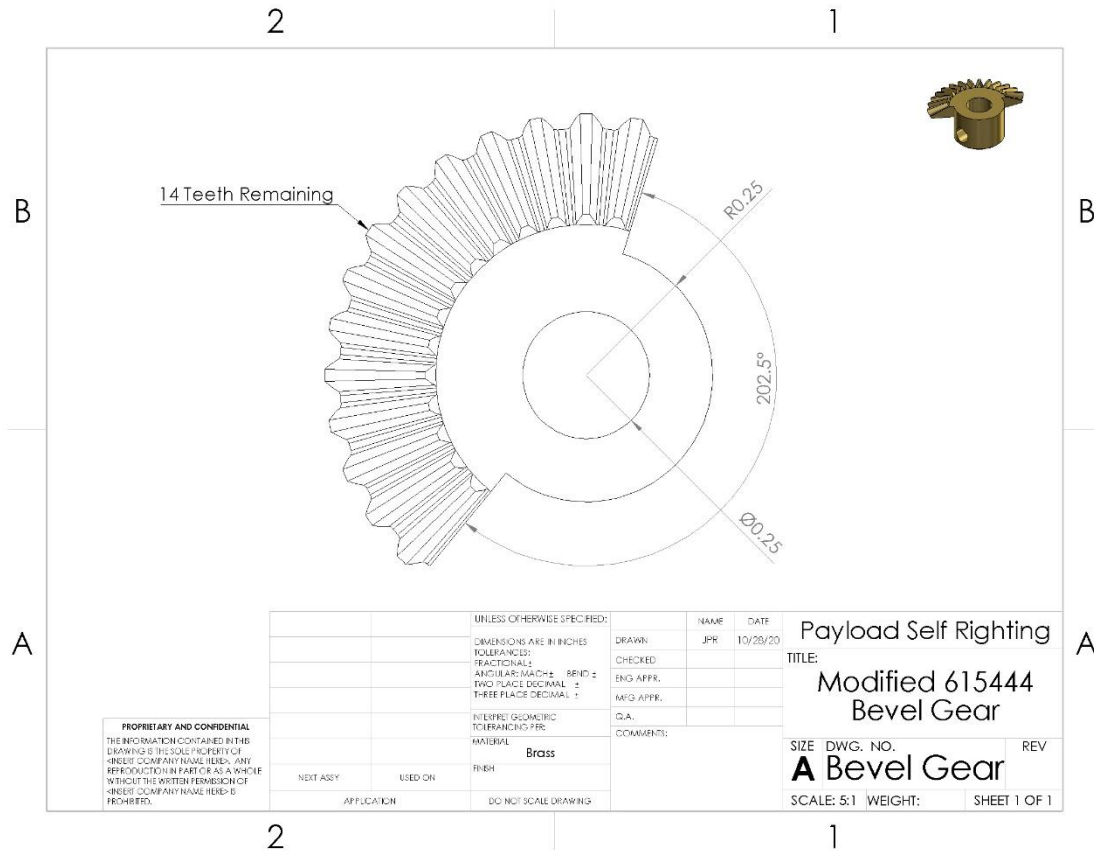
Dimensioned drawing of the cut down bevel gear.
